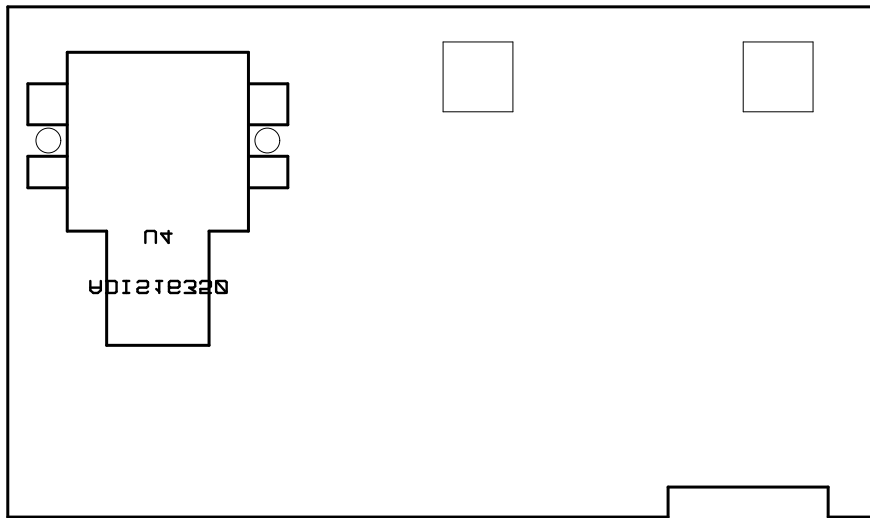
PCB placement for components on the copper side (Second Prototype)
